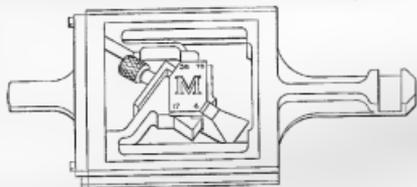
Monotype casting machine; large-work matrix-holder for sorts-casting.
